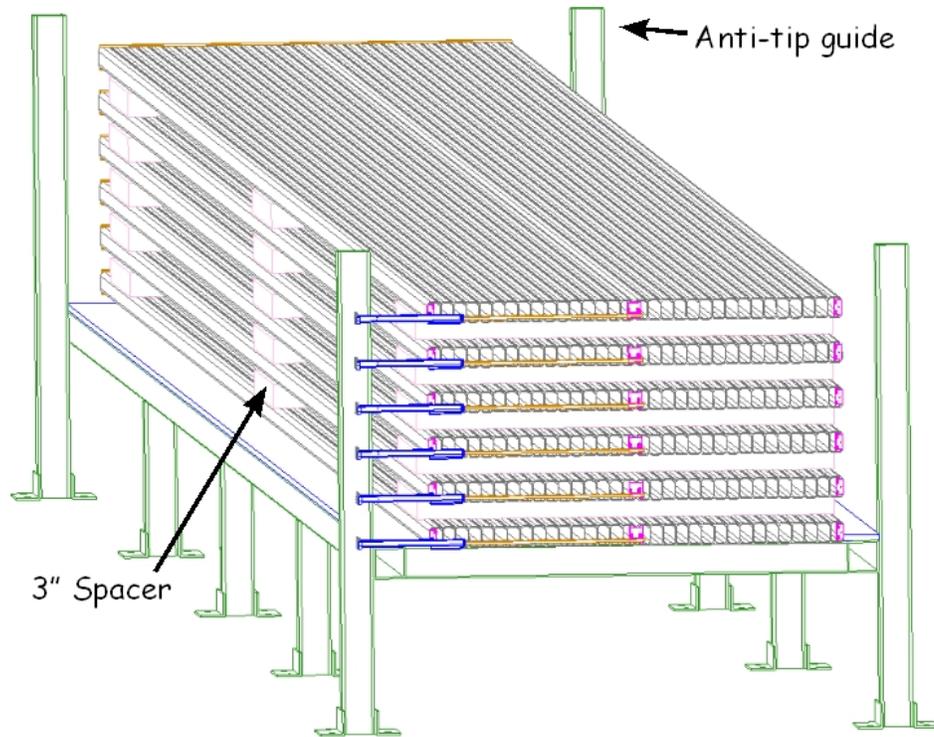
Gluing rack for 8 modules. The center and side seals are glued into each end as is the lower fiber raceway and the lower half of the manifold snout assembly.
